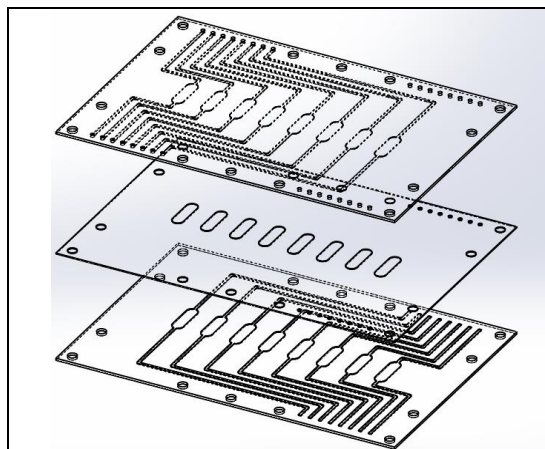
Schematic drawing of the 3 layer microchip. Dimension of microchip: 76mm x 52mm x 2.7mm. Thickness of modified membrane is 0.3mm. Membrane is coated with thiol-ene mixture on both sides to ensure good bonding between the chip layers. Fluids are pumped in the upper and lower layers.
